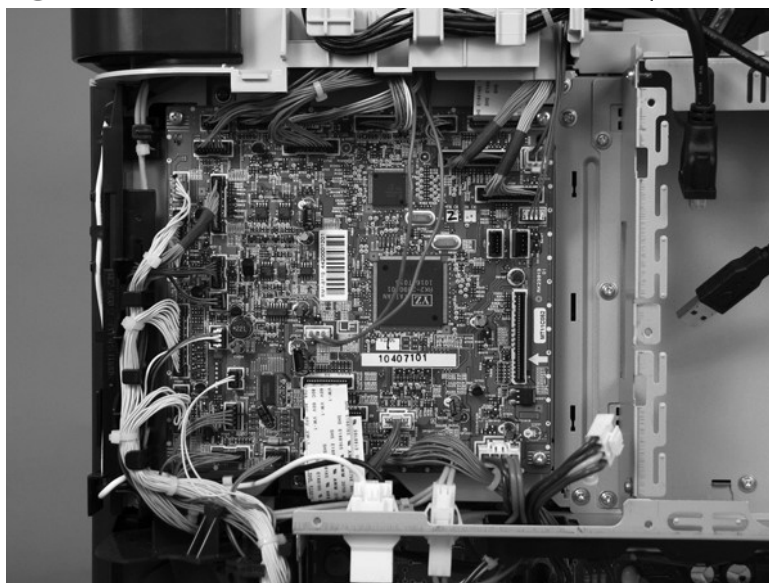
Remove the DC controller PCA and tray (1 of 4)
